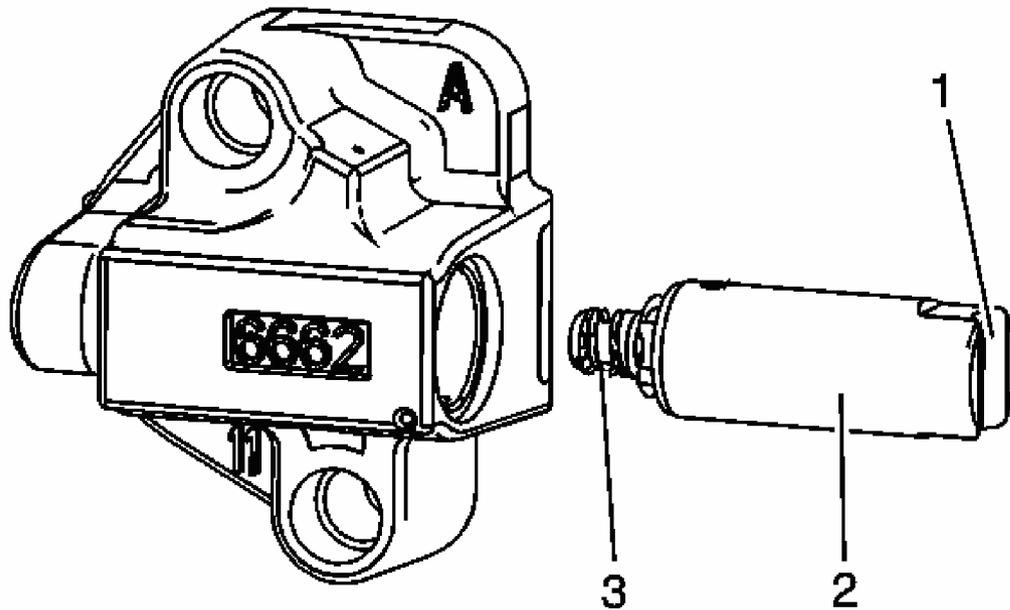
Inspecting Right Secondary Timing Chain Tensioner
